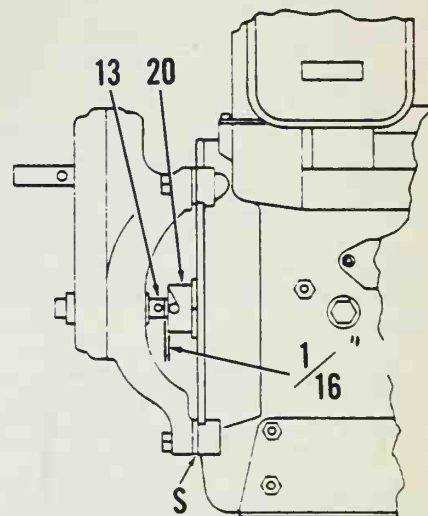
Output shaft pin (13) must be at least 1/16-inch from crank jaw (20) when disengaged. Install shims (S) between starter housing and engine to obtain clearance.
